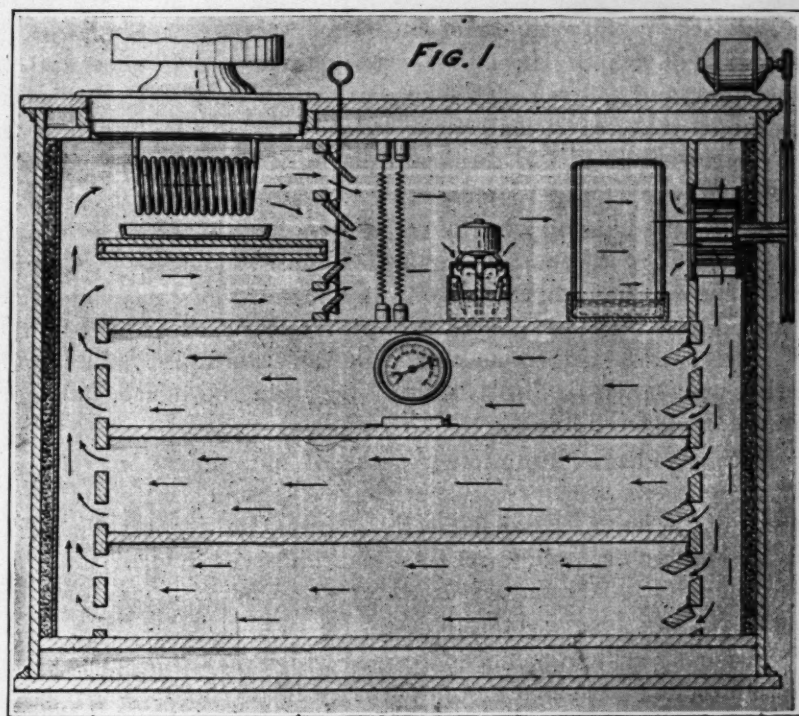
View showing Constructional Details of Fermentation Cabinet.
